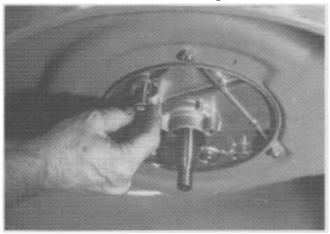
Tighten all four engine mounting bolts to 150-190 in. lbs. (11-15 ft. lbs.)
